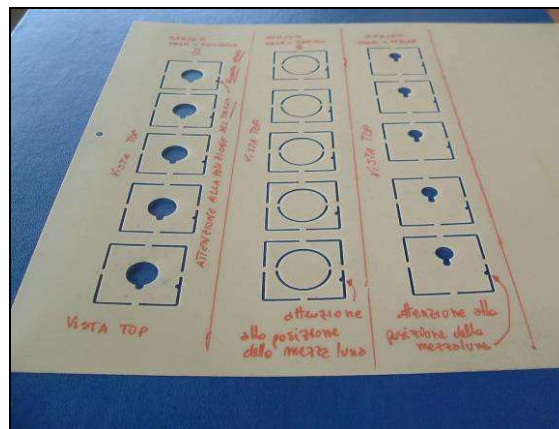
the fabricated Spacer layers for different sensor prototypes dimension.
